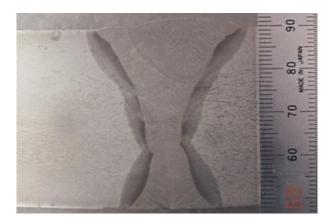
40mm asymmetrical x-joint 355NL. Six runs to complete the weld.
